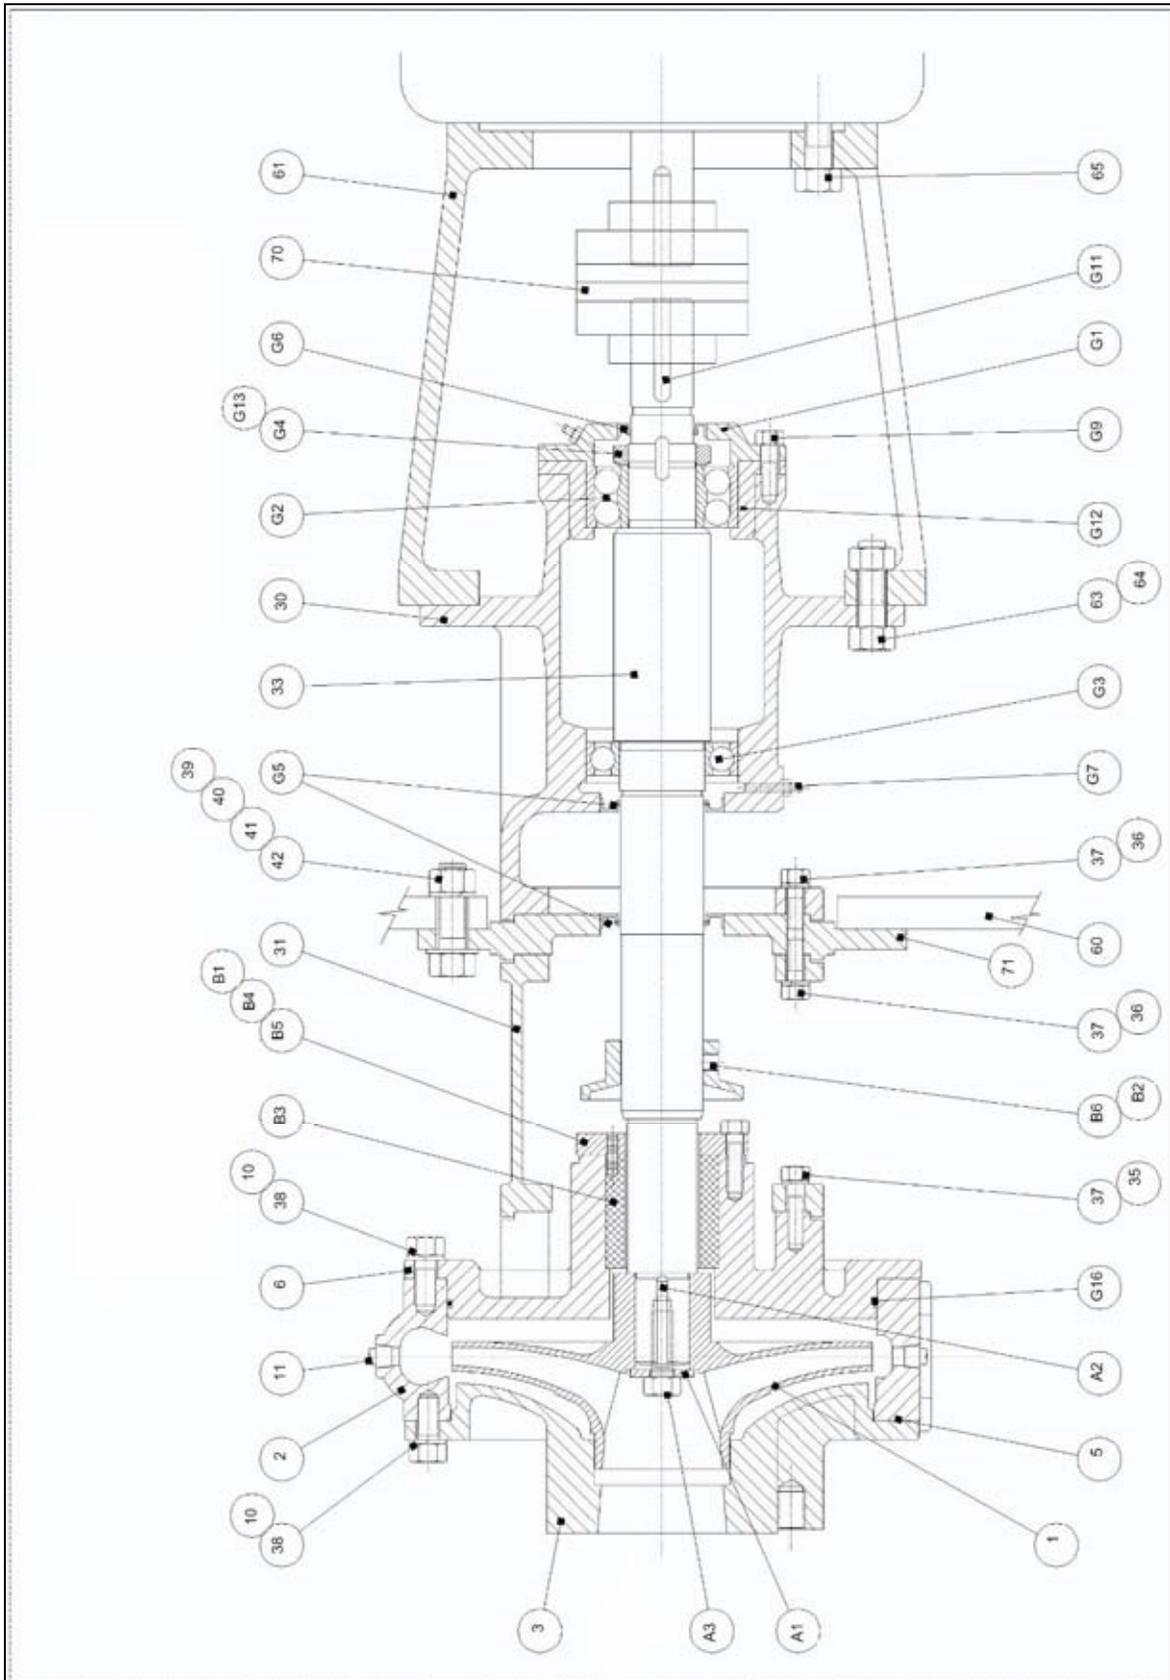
Main Pump Cut Away 1530 Frame Composite Throttle Bushing
